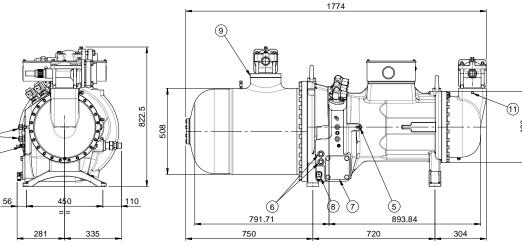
dimensional drawing of the models: ES3-L110/L120/L140
